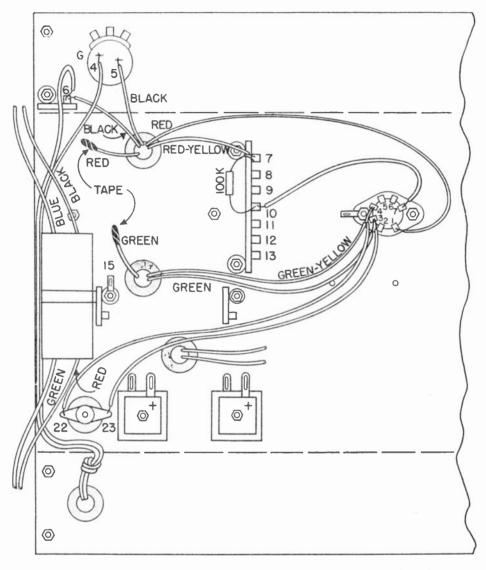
This is how your chassis will look for the circuit in Fig. 7.
